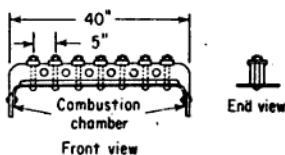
Girder stay for supporting crown sheet of locomotive firebox and scotch marine boilers.
